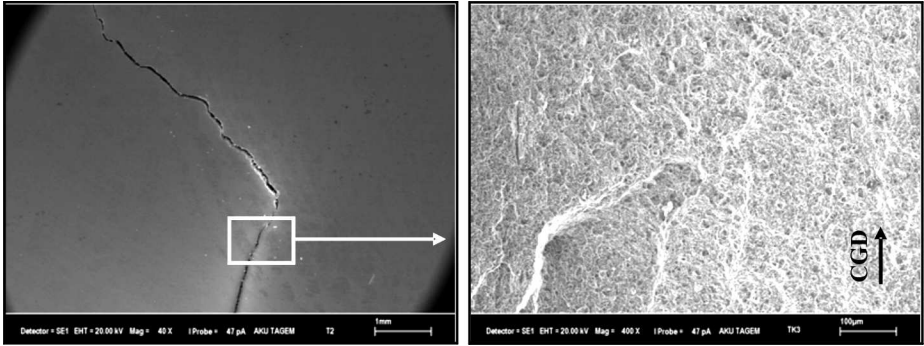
(a) Change in the direction of the large crack growth, (b) fracture surface of the circular saw
